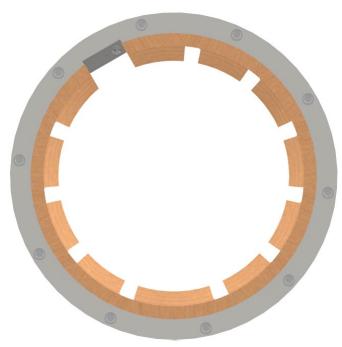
Lubrication groove in a Stern Tube Bearing designed by Hydo Tech.
